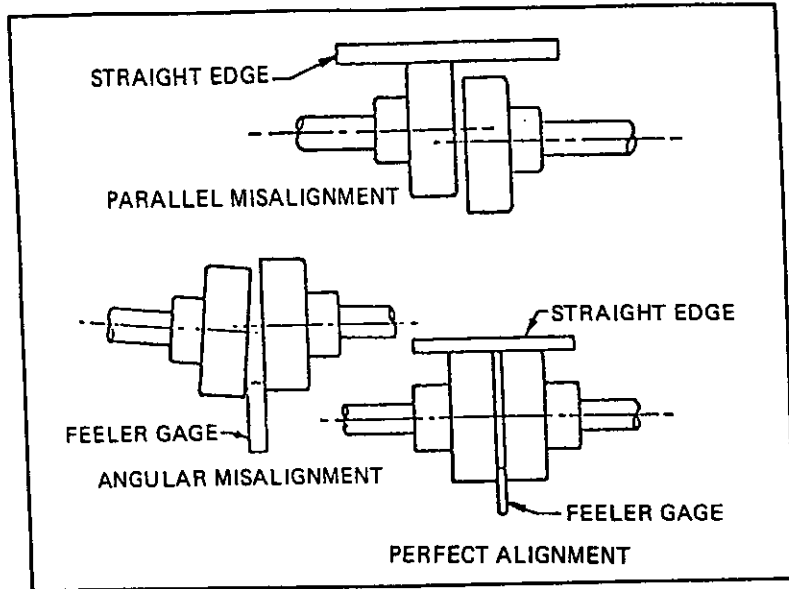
TESTING ALIGNMENT, STRAIGHTEDGE
